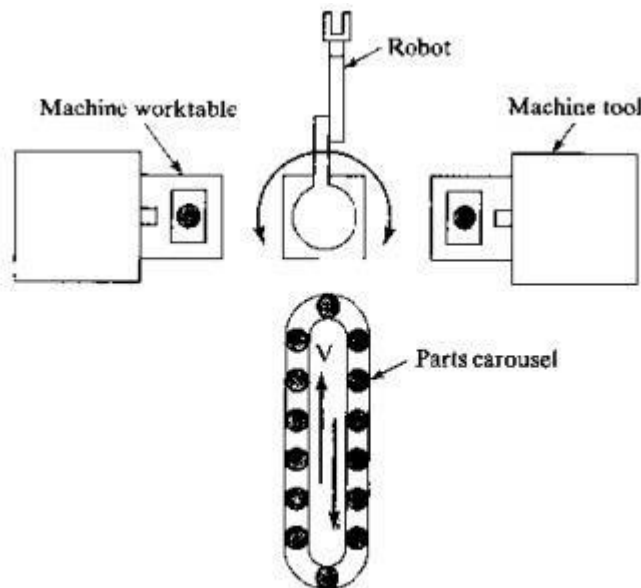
Automated manufacturing cell with two machine tools and robot. Is it a flexible cell?
